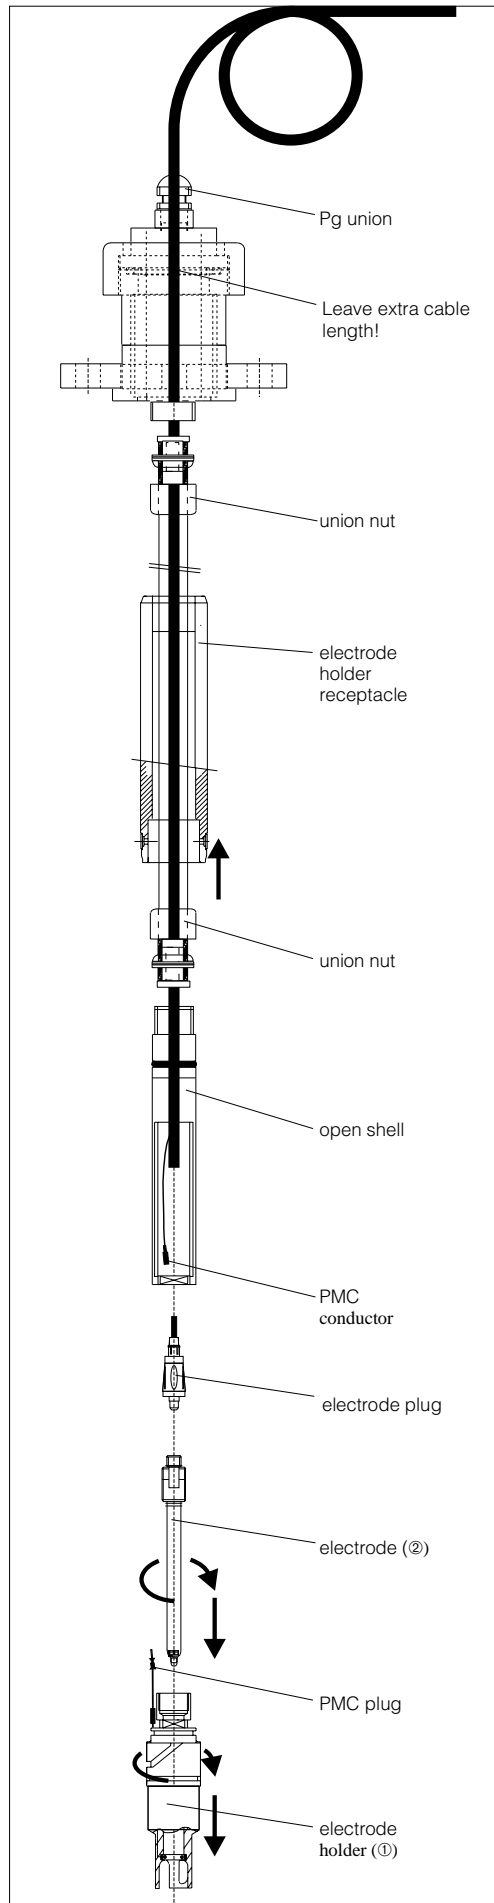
Mounting pH/Redox electrode and electrode cable with plug
